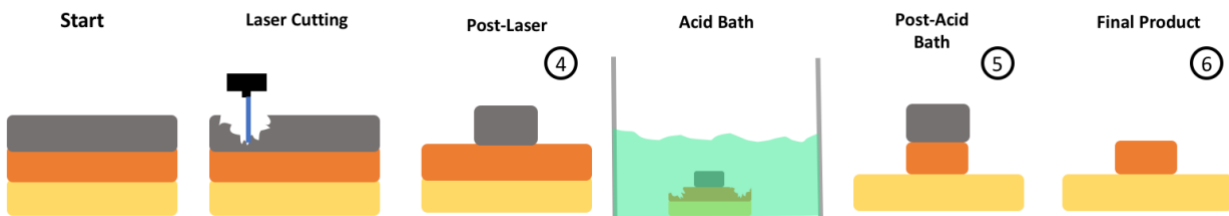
Prototype Board Layering - The process of creating homemade printed circuit boards relied on the differential layering of an initial board, consisting of paint primer (gray), copper (orange), and fiberglass (yellow). A laser cutter removed undesired segments of primer (4) followed by an acid bath to remove the exposed copper regions (5). A nonpolar solvent would then be used to strip the remaining paint primer to reveal the predetermined copper electrical leads (6). The numbering above each step corresponds to the pictures in Figure 13.
